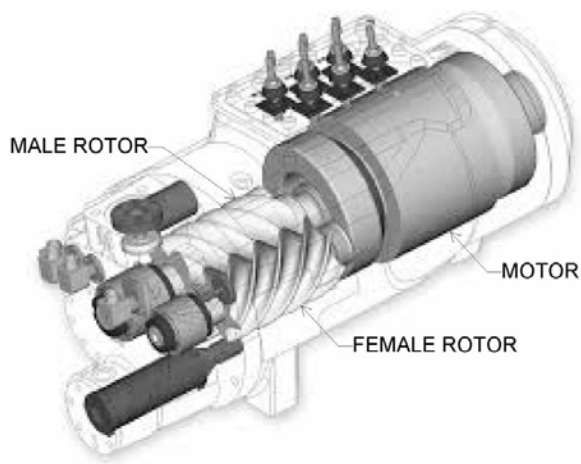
Cut-away view of a typical screw chiller, with major components labeled. Adapted from Trane [14].
